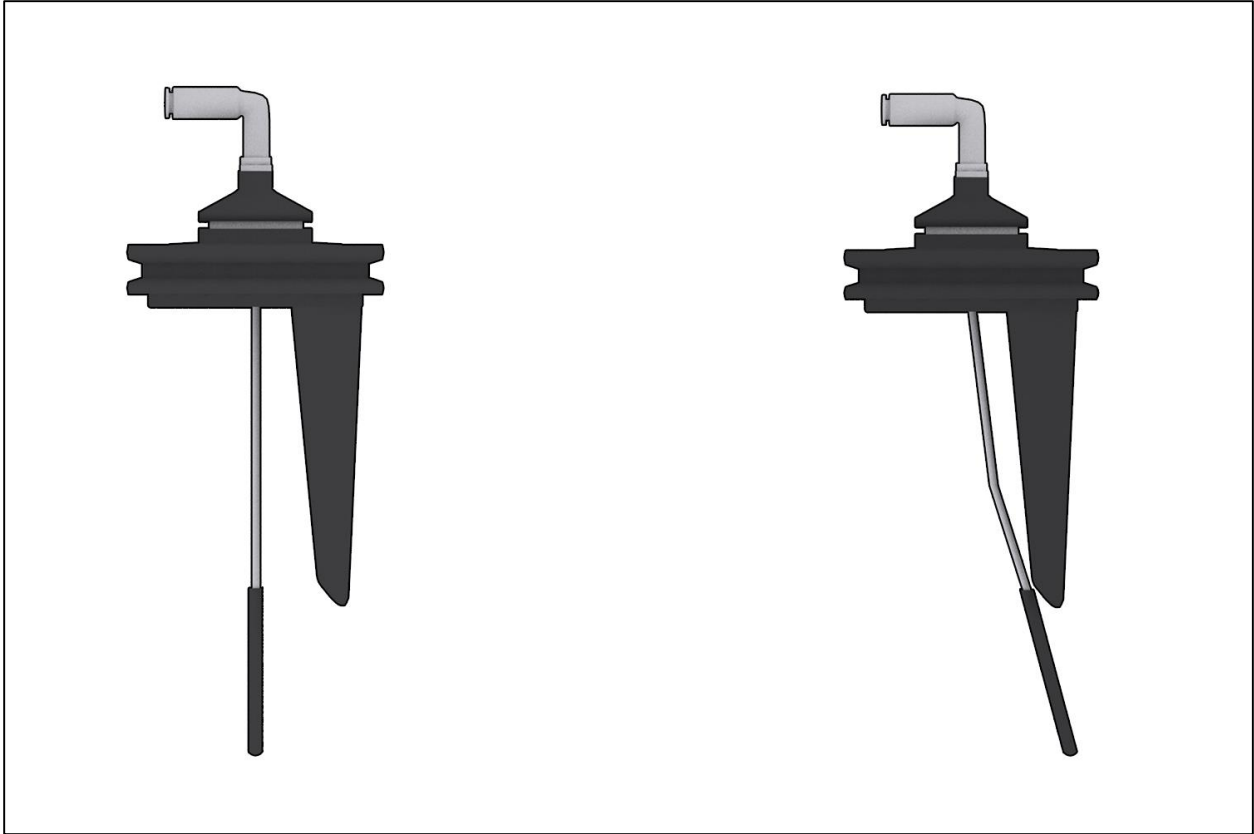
A bent breathing bag spring shown on the right. The nonflawed spring is shown on the left.
